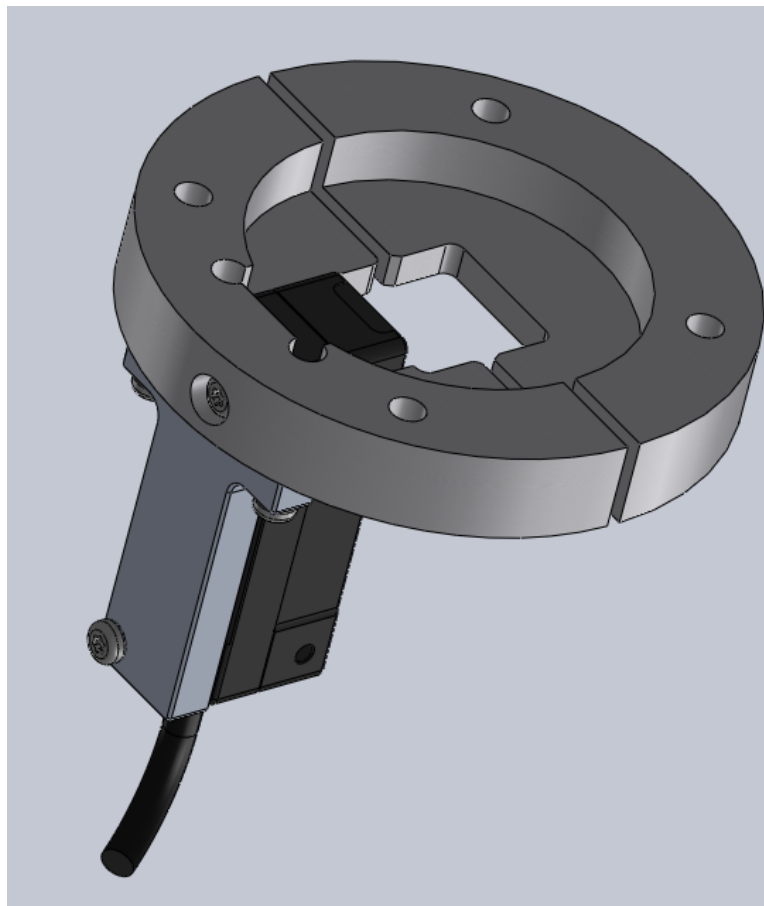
Attachment of the Magnetic readhead onto the piston guide using a custom bracket
